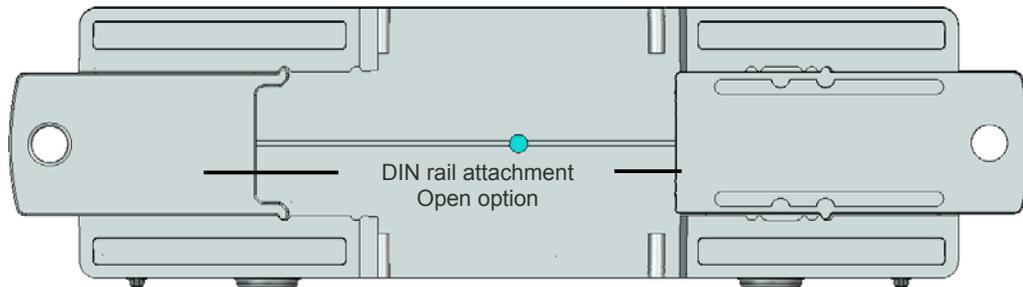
EZ863 Terminal rear view 2 – DIN rail attachment open
